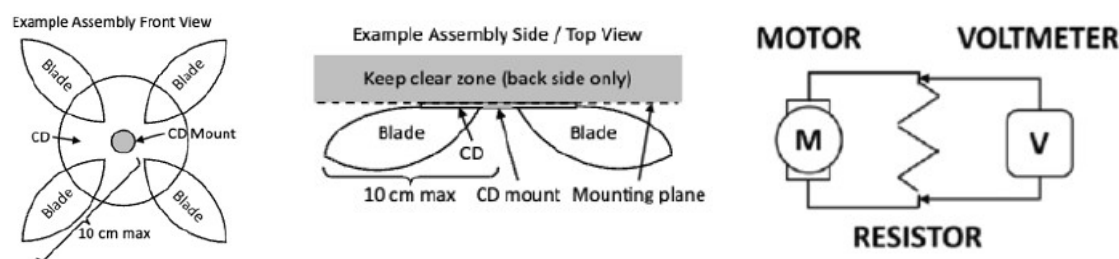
Illustration of the blade assembly and its testing circuit defined by the 2025 Science Olympiad div. C Wind Power (4)
